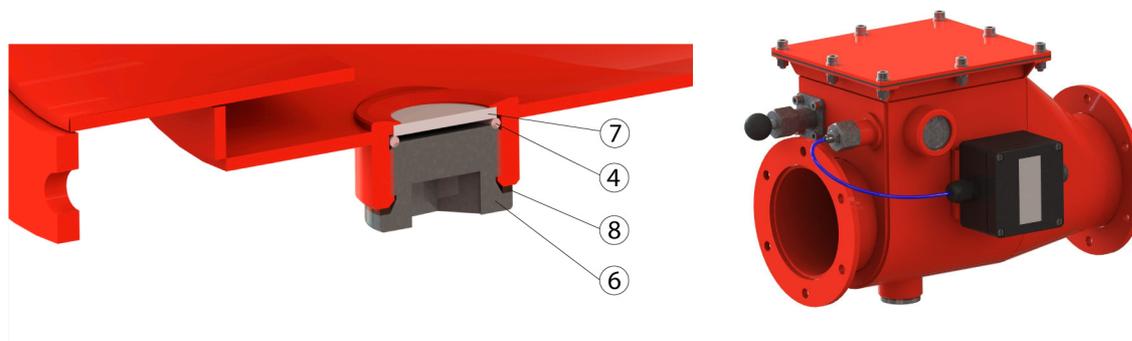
Blinding of the adapter (4 – o-ring, 6 –plug (DIN 908, M30x1,5), 7 – stainless steel lid, 8 - Cu seal,)
